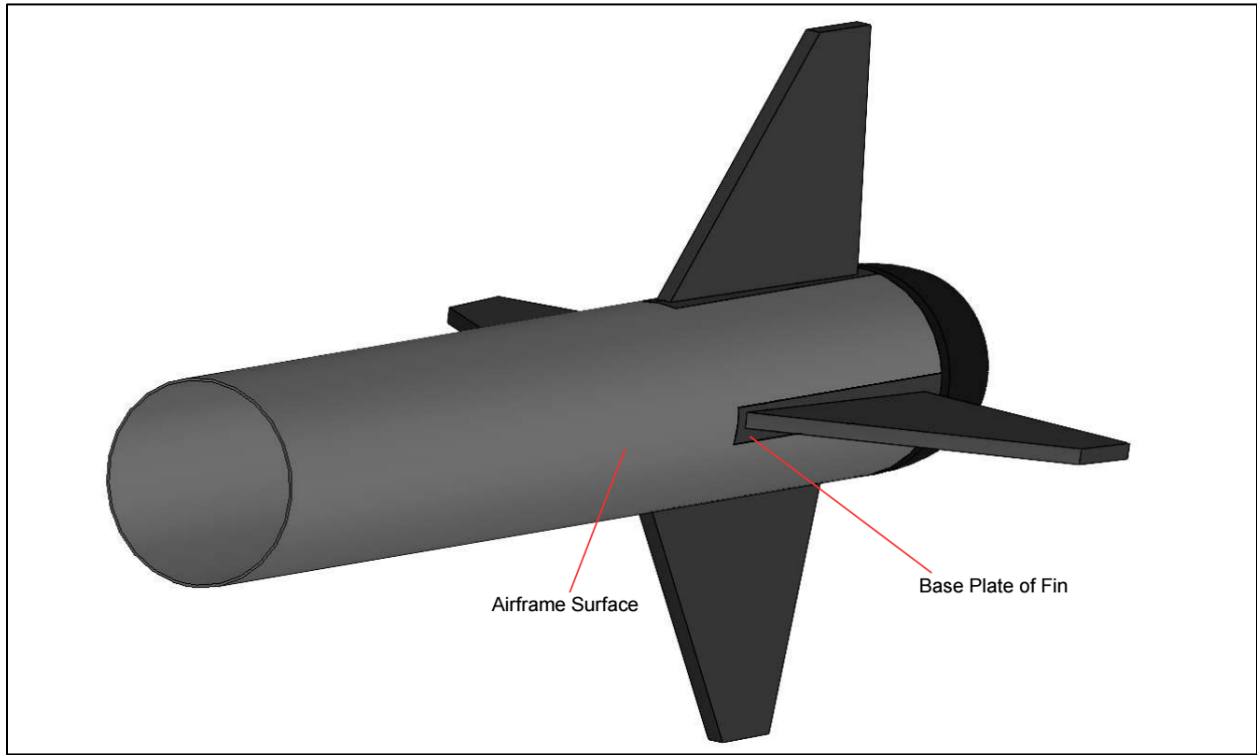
Lower Payload Bay/Fin Can Solid Assembly
